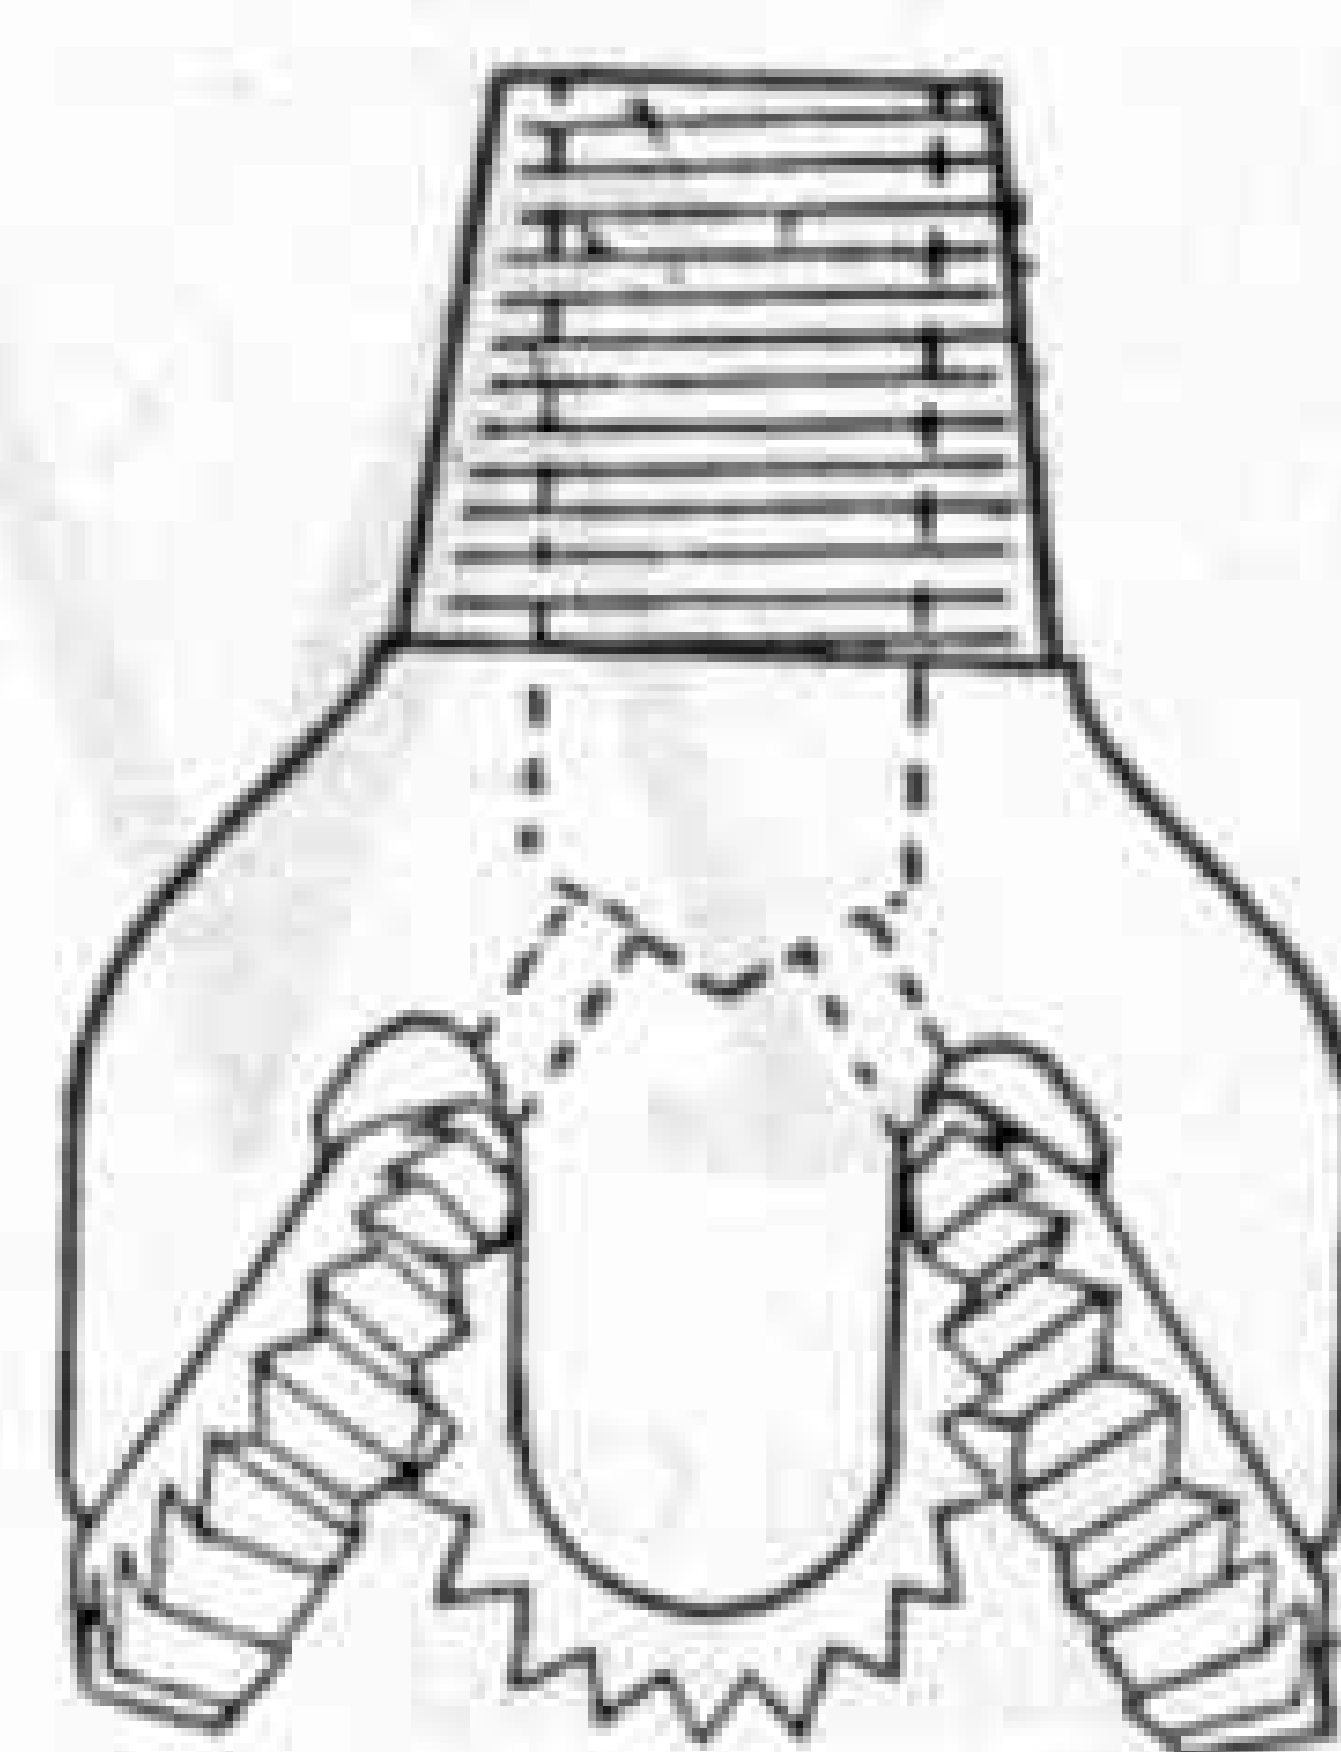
Fig. I. Rock Bit, showing rotary cutters, coarse taper thread for attaching to drilling collar, and passages for mud.
